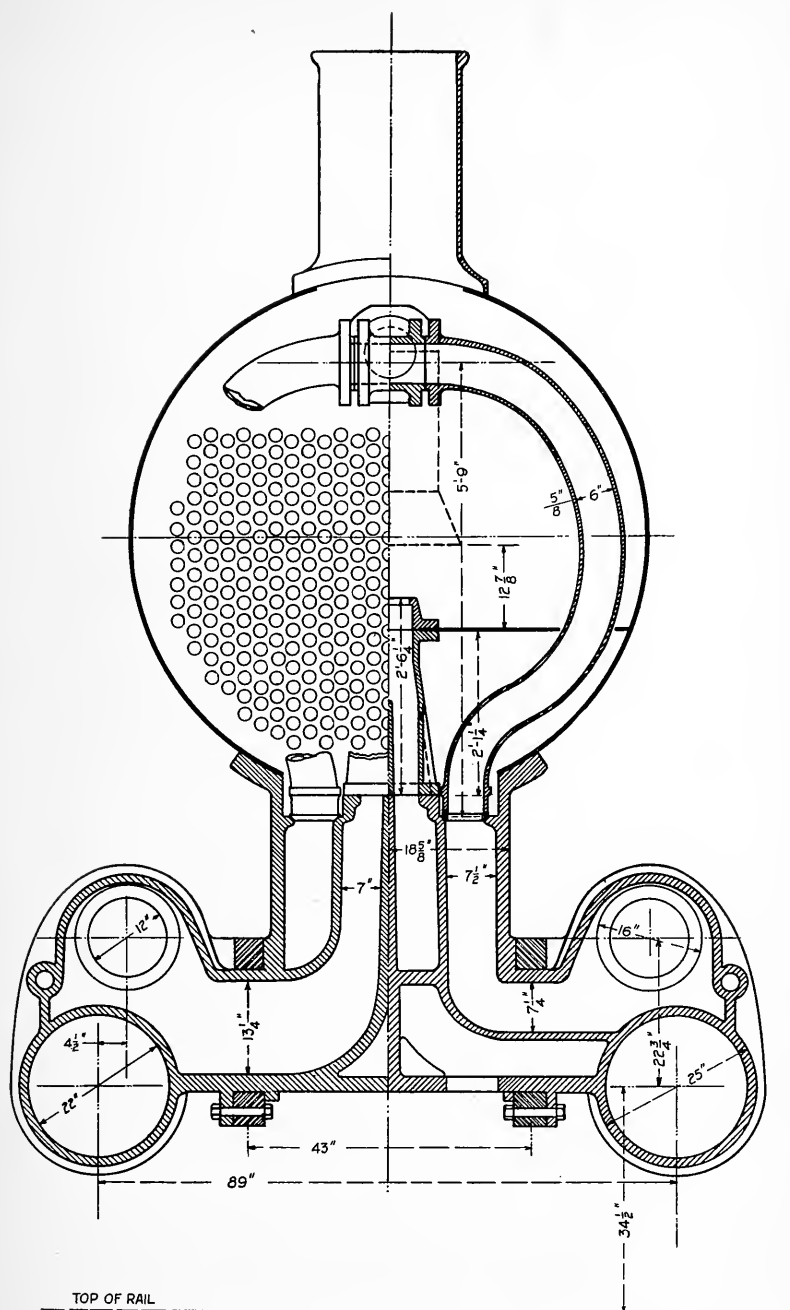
CROSS SECTION THROUGH THE FRONT-END AND CYLINDERS.
